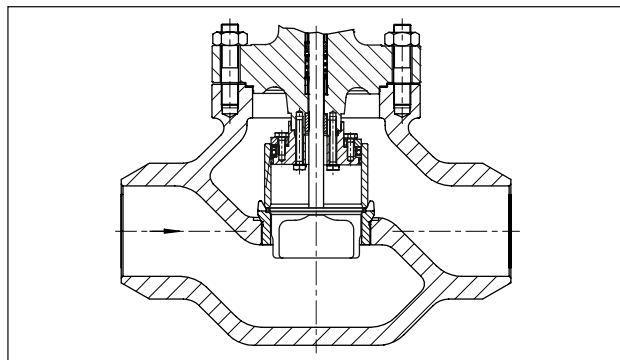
Type 3251/3251-AM Valve with welding ends and balanced plug
